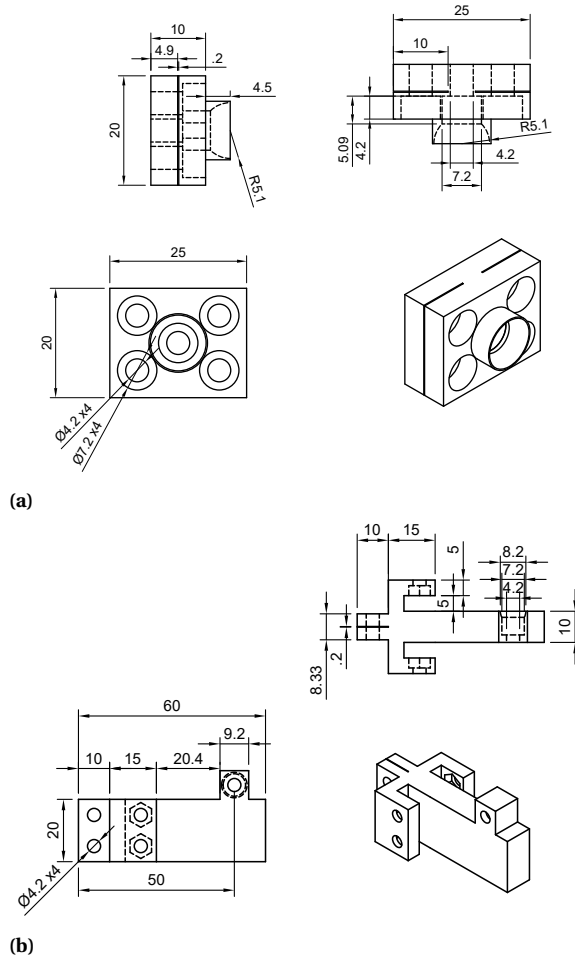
Technical drawings and dimensions of shuttles for buckled stepped beam (a) and buckled parallel guidance (b)
